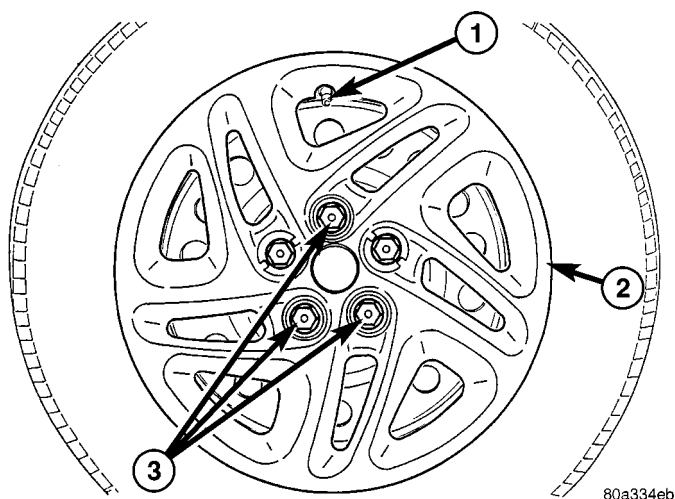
Wheel Mounting Nuts Securing Wheel Cover
